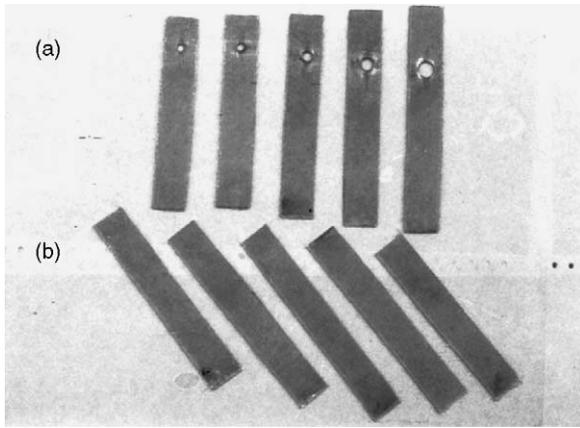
(a) Obtained specimen with circumcolumnar layout and (b) Obtain specimen used for drilling hole.
